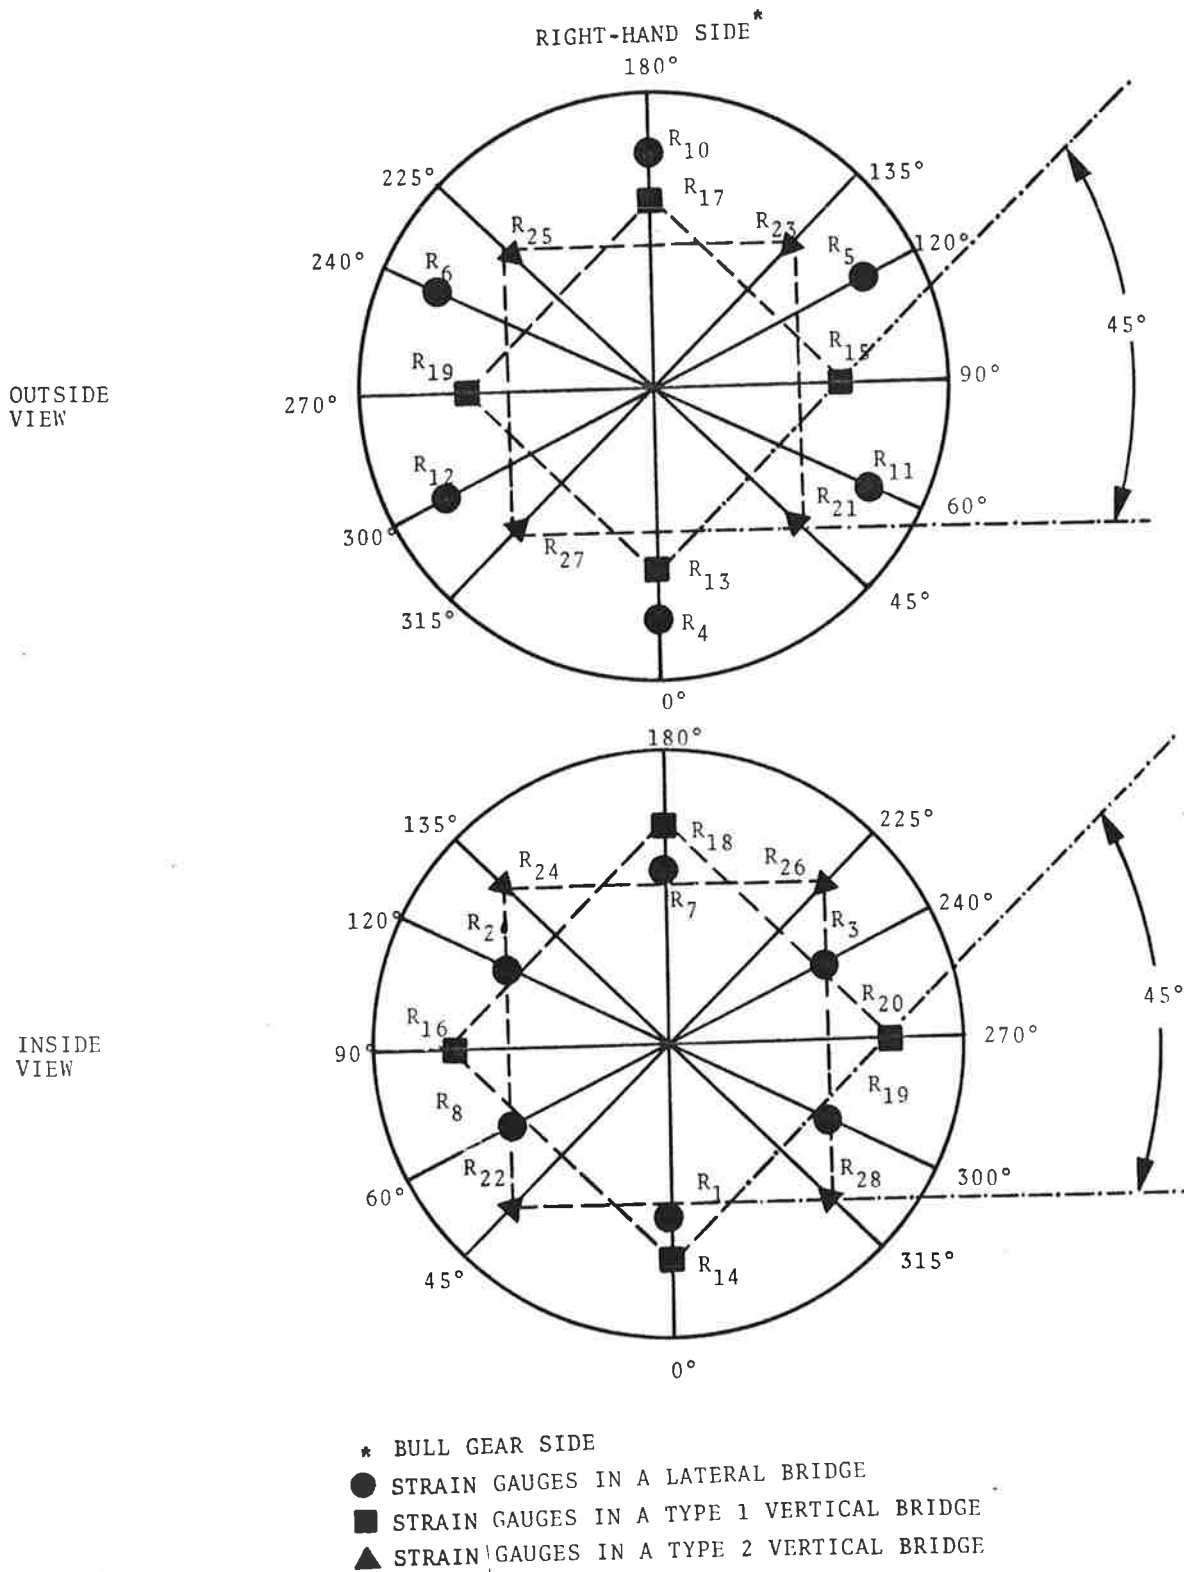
B. DIAGRAM INDICATING THE POSITIONS OF STRAIN GAUGES ON THE INSTRUMENTED PLATE WHEELSETS: RIGHT-HAND SIDE
